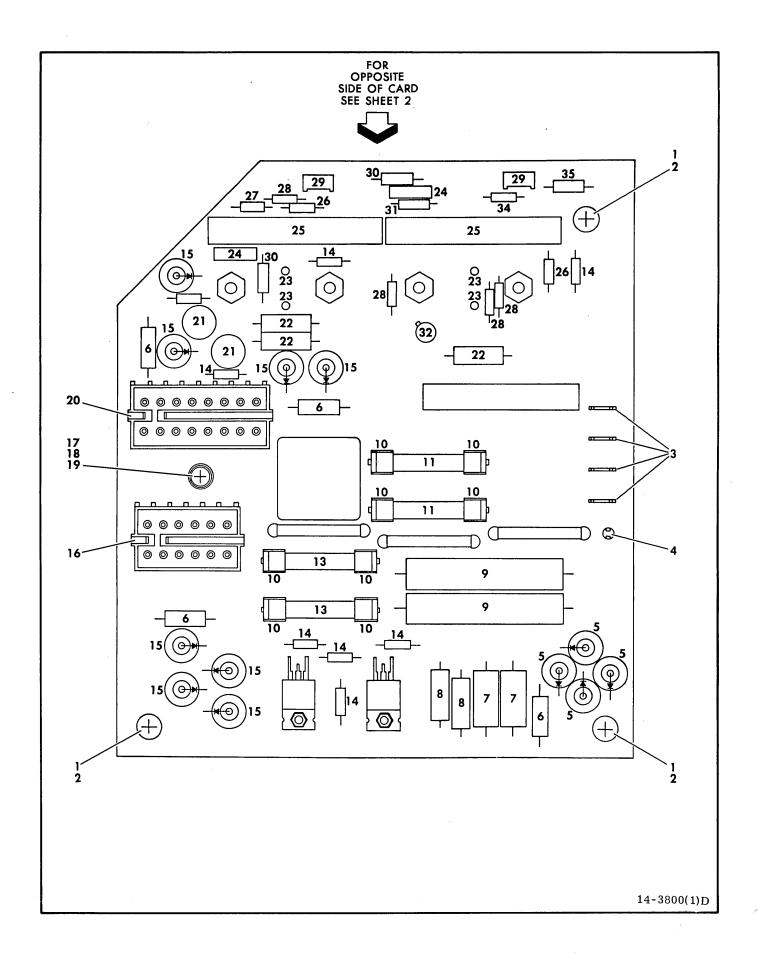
Component Assembly, Type _XKV (Sheet 2) Used on S/C 24 and Above
